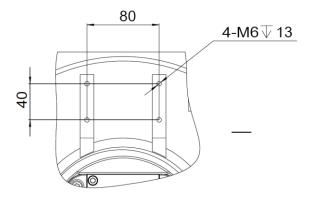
AIR10-1700A-HW manipulator elbow load interface dimensions
